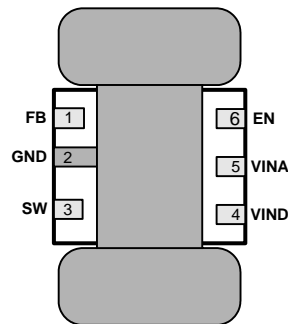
6-Lead WSON PCB Dog Bone Layout
